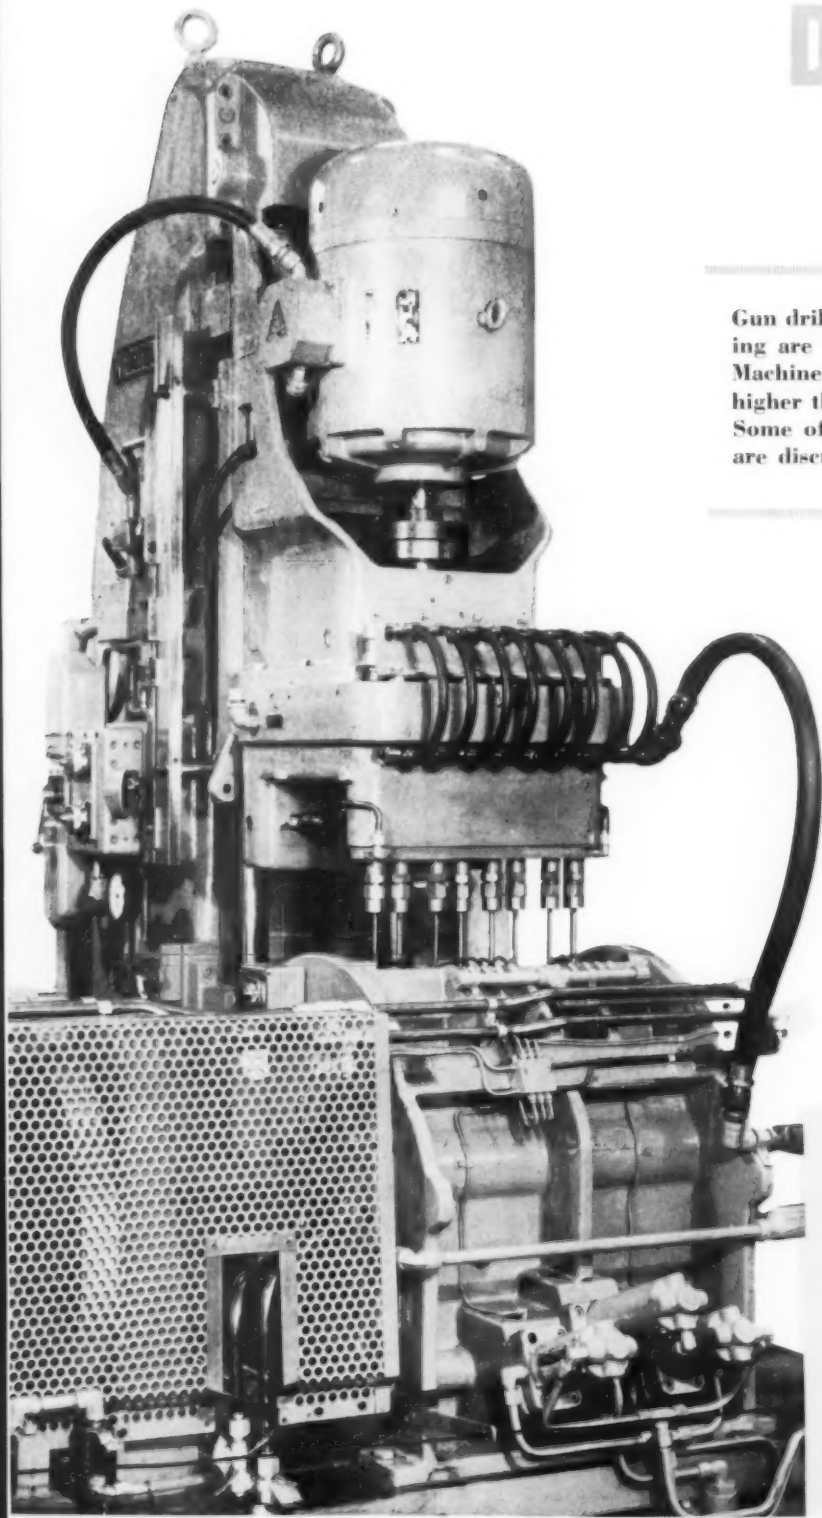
Short cycles are obtained by using gun drilling techniques to machine valve guide holes.
